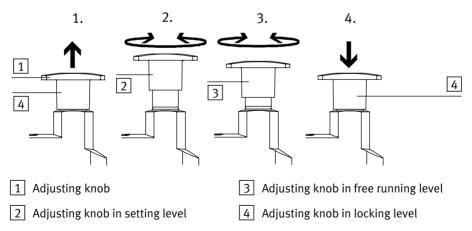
/4: Setting the pressure regulator plates with the aid of the adjusting knob
